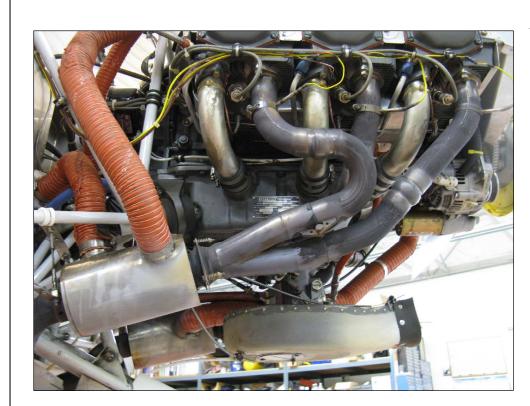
INSTALLATION OVERVIEW - RIGHT SIDE
